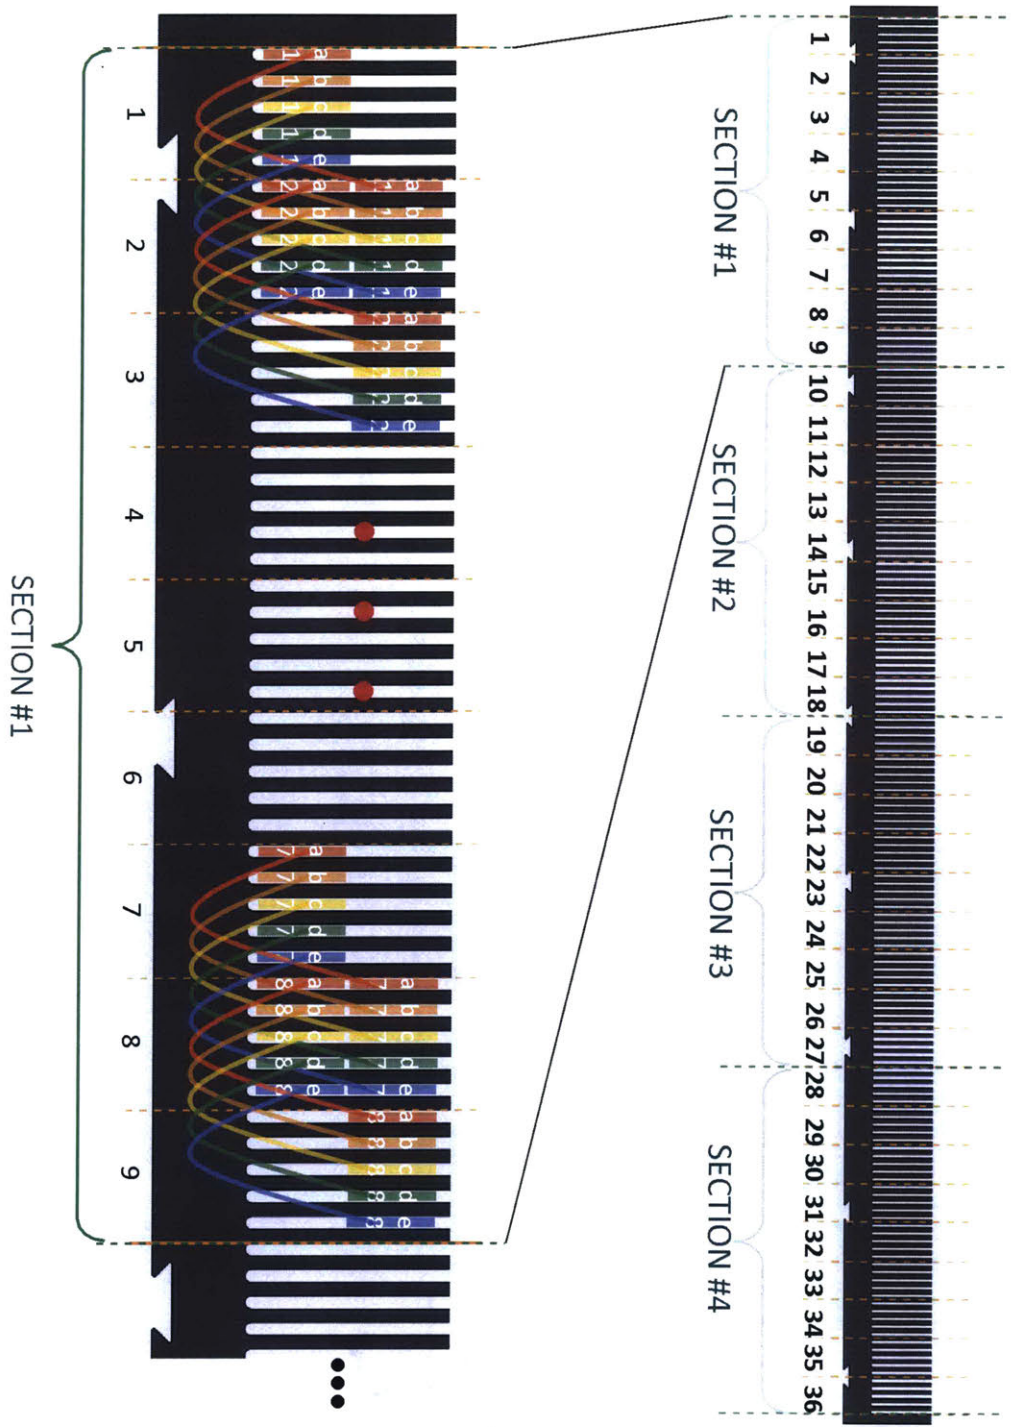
Winding scheme of 5-phase double-layered full-pitch concentrated windings for the newly-designed fine-tooth motor stator.
